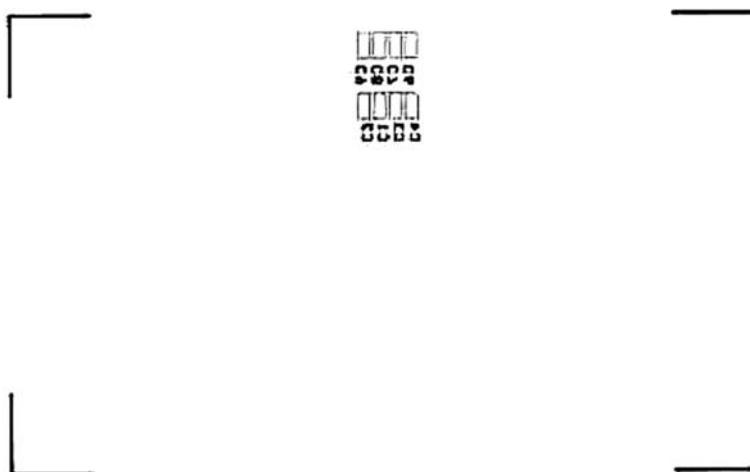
PCB component (*bottom*) layout of power supply part of CO-monitoring device
